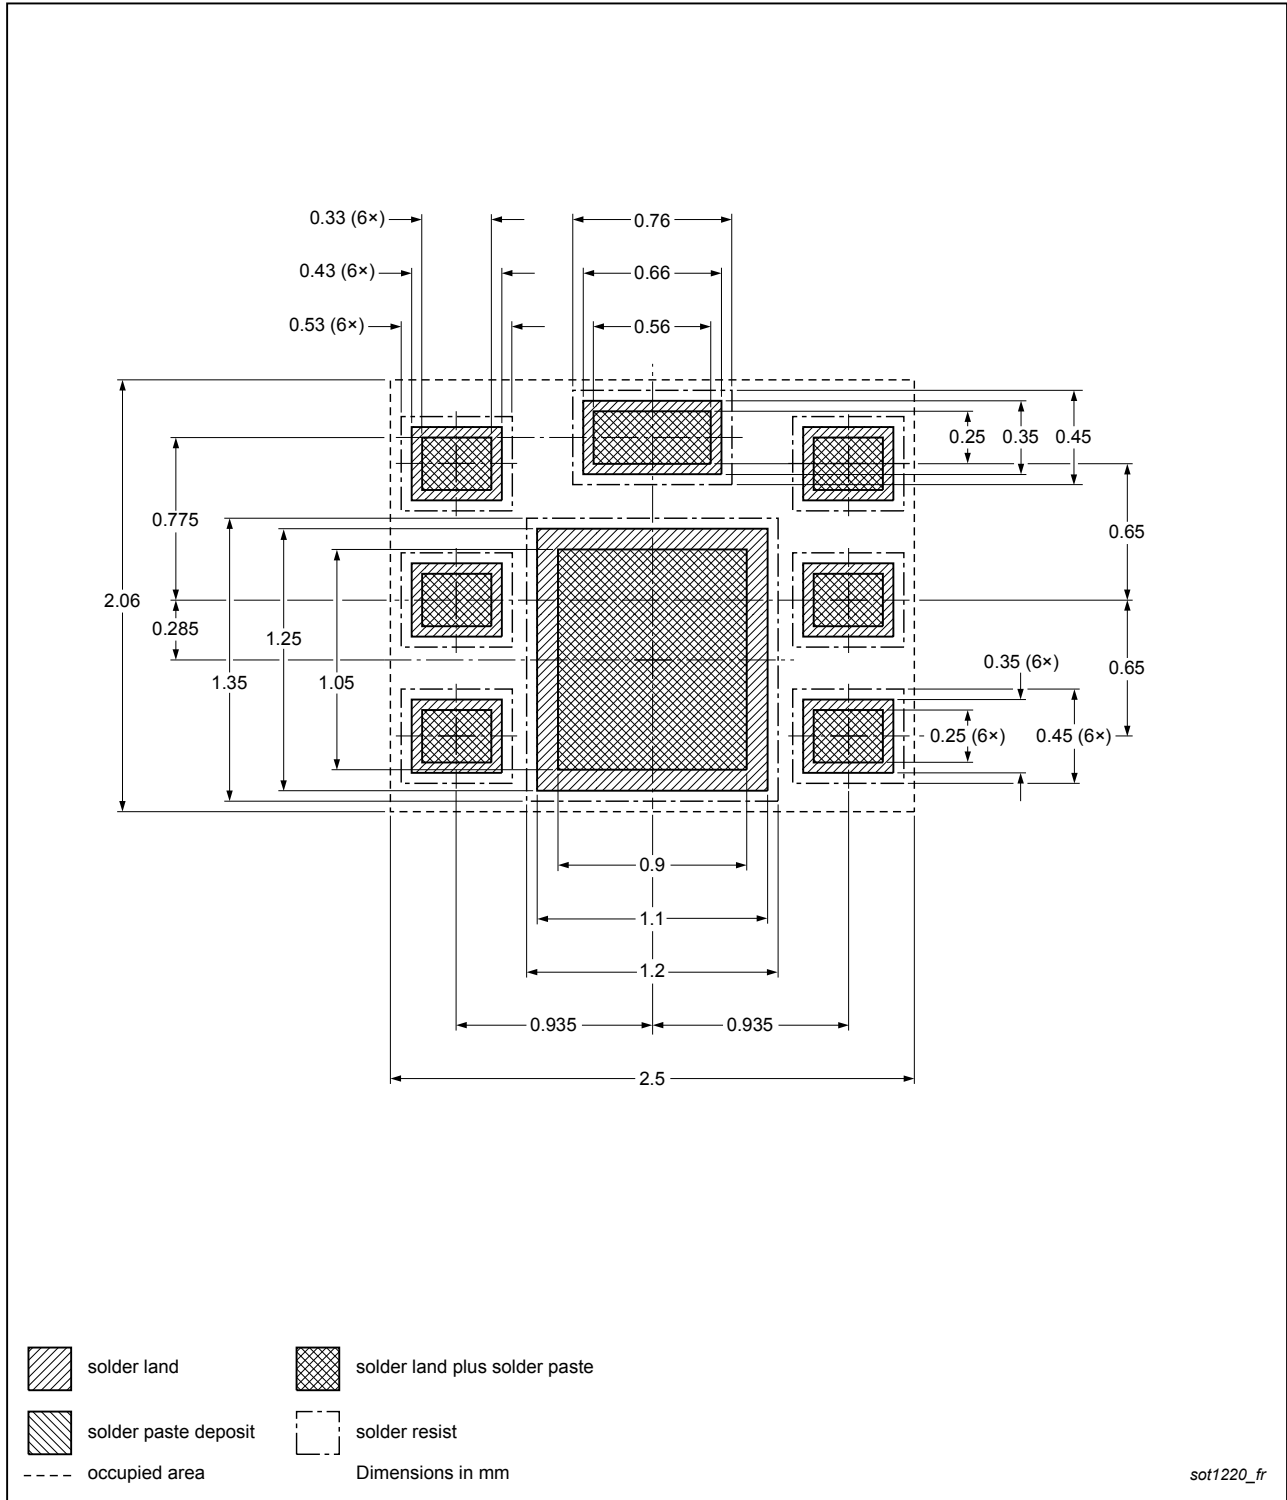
Reflow soldering footprint for DFN2020MD-6 (SOT1220)
